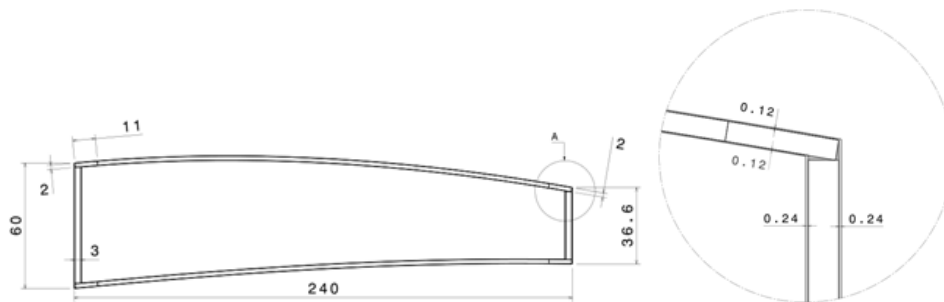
Inboard fixed wing cross section showing structure dimensions (in mm)
